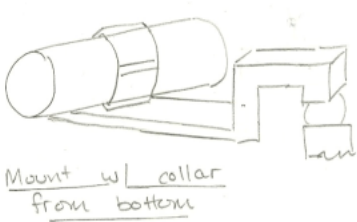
Pump/Motor Undercarriage Cradle Support
